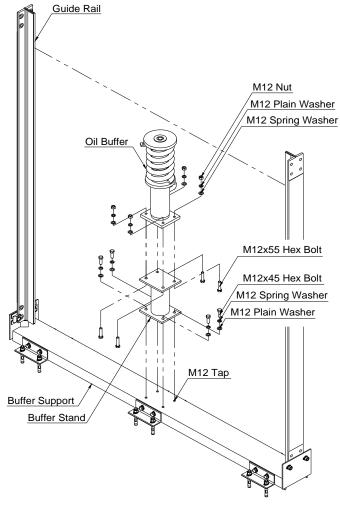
A. BUFFER INSTALLATION (with BUFFER STAND)
